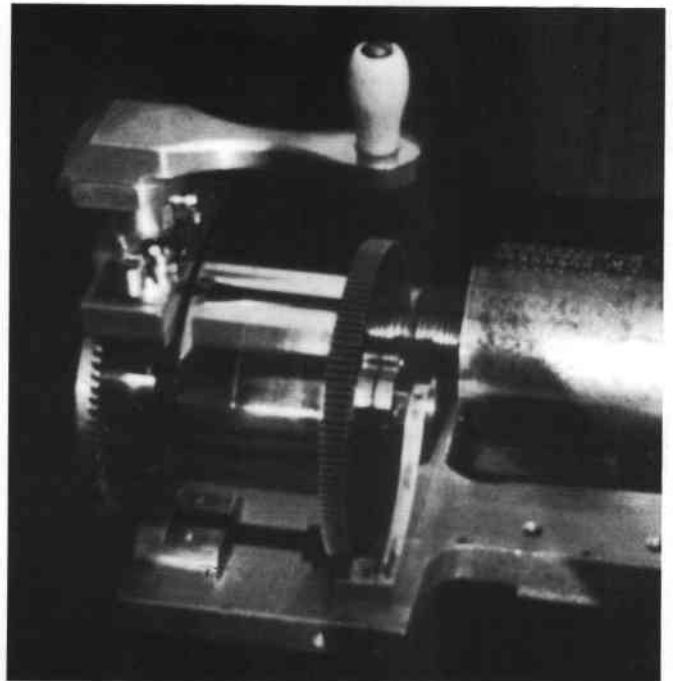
Handle folded to winding position, on shaft with a small pinion engaging a large crown gear on the spring arbor.
